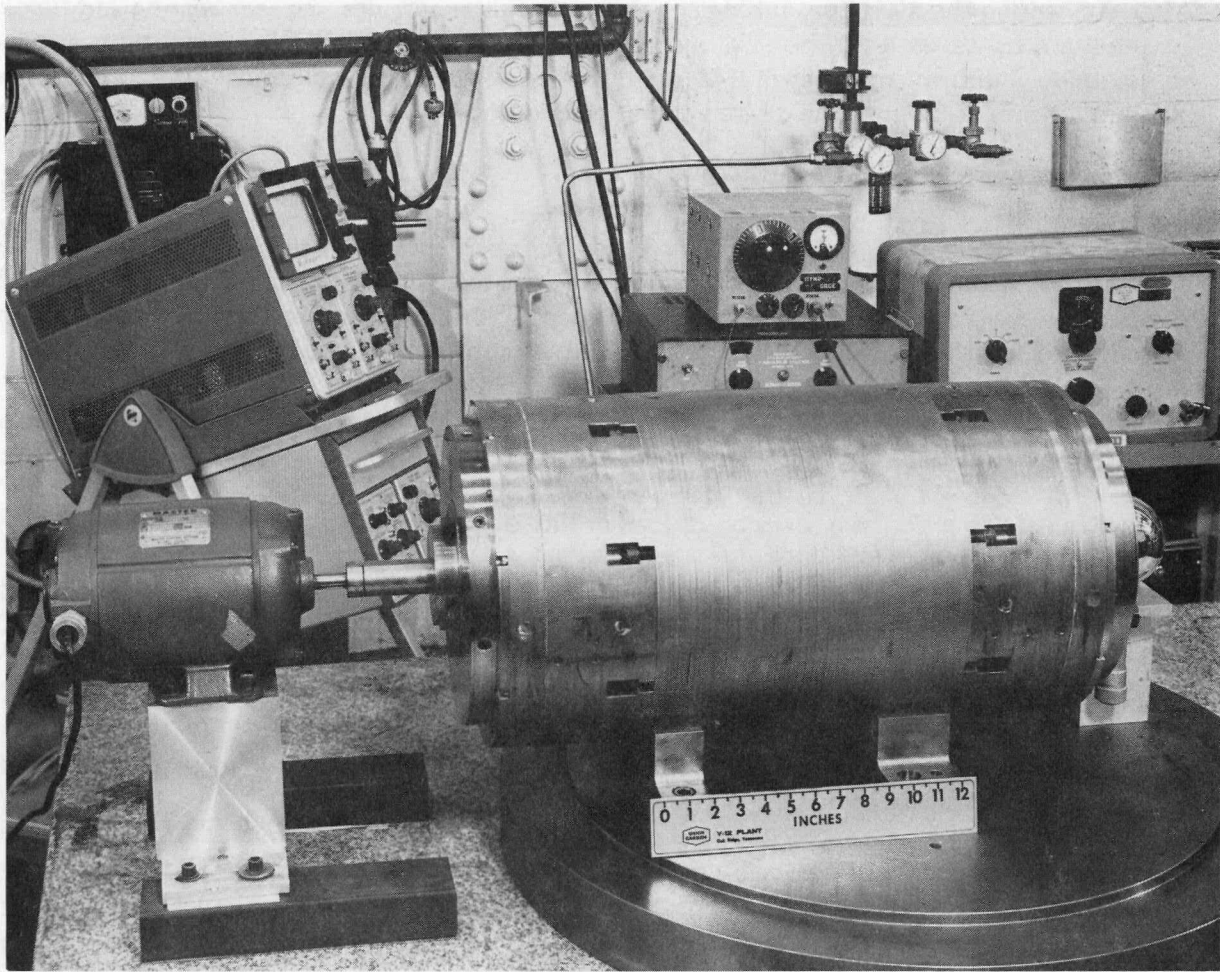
AIR-BEARING SPINDLE BEING TESTED.
